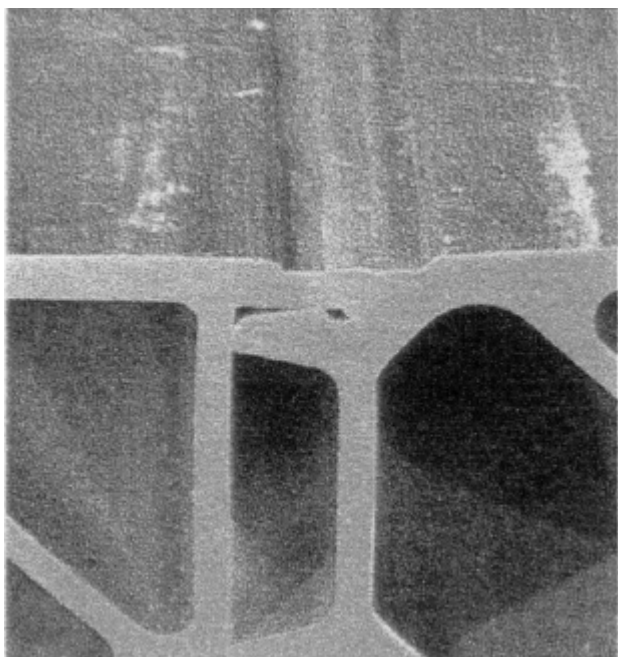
Welding of extruded aluminium profiles using the HWT laser beam / plasma /17/
